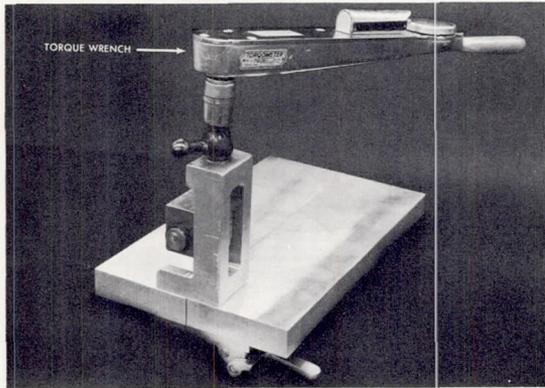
Fitup tool applied to 1-inch-thick test panels.
